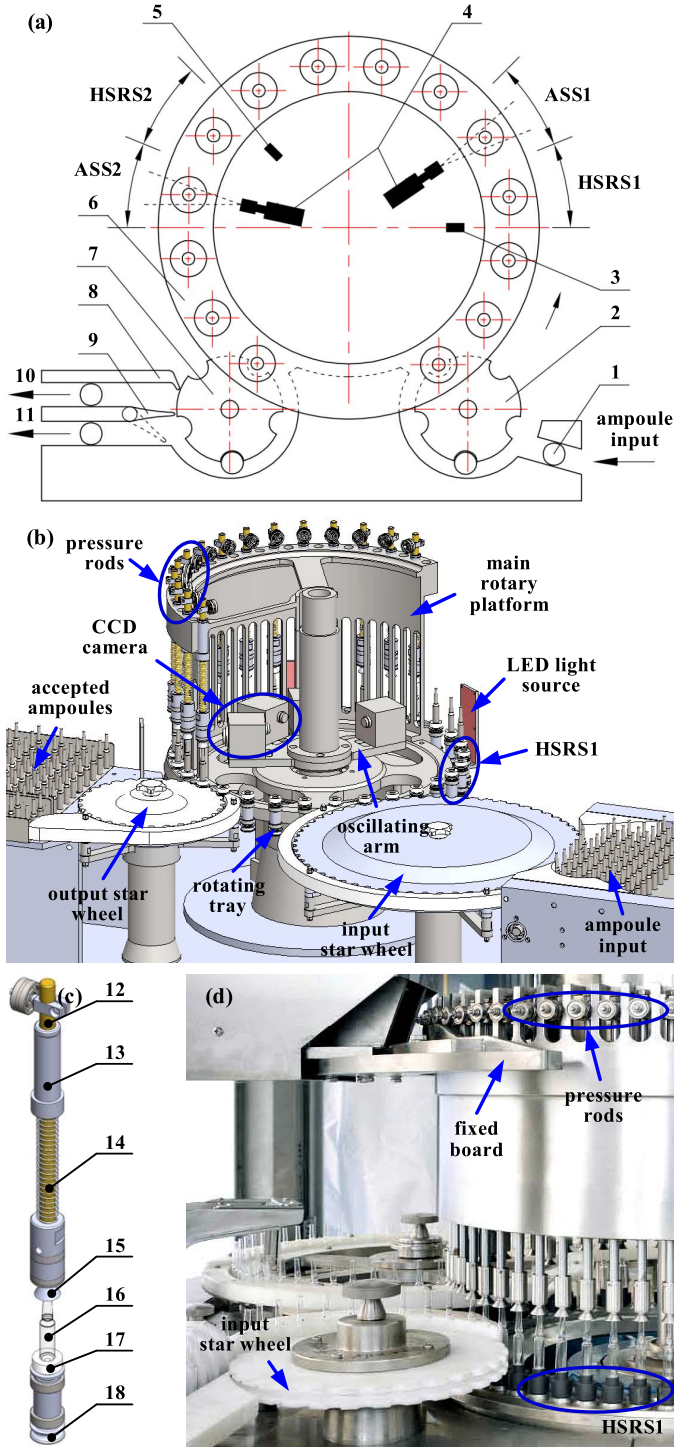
(a) Top view of the automated ampoule inspection system (1. ampoule injection; 2. input star wheel; 3. photoelectric sensor I; 4. CCD camera; 5. photoelectric sensor II; 6. main rotary platform; 7. output star wheel; 8. baffle; 9. striking fork; 10. rejected products output; 11. qualified products output). (b) Section view of the automated ampoule inspection machine. (c) Active spring-loaded clamping mechanism (12. pressure rod; 13. flanged sleeve; 14. spring; 15. rotatable cap; 16. ampoule injection; 17. rotating tray; 18. V-belt pulley). (d) A snapshot of the constructed system.
